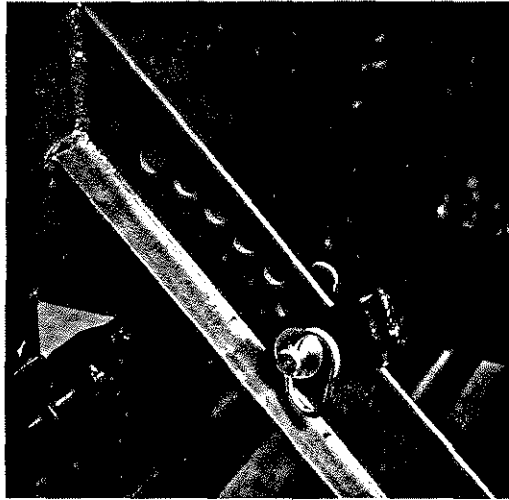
Pull Bar Slide Assembly with Pin in Locked Position.
